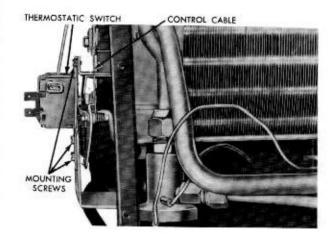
Thermostatic Switch Installation-Ranger and Pacer-1958-(E-2638)
